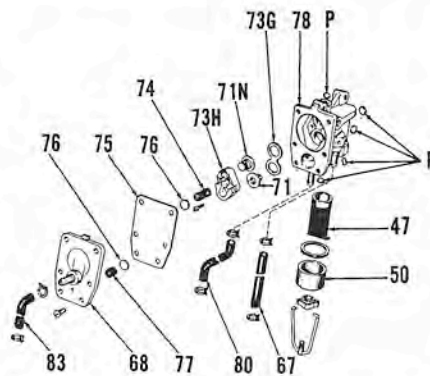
Exploded view of fuel pump and strainer used on some motors.
